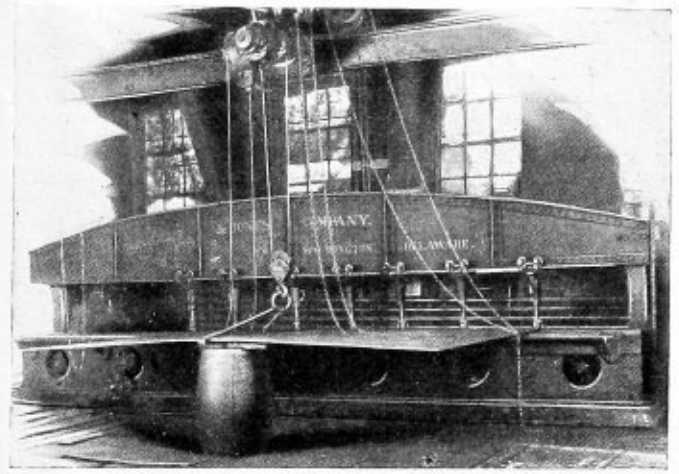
20-Foot Hilles and Jones Plate Planer
